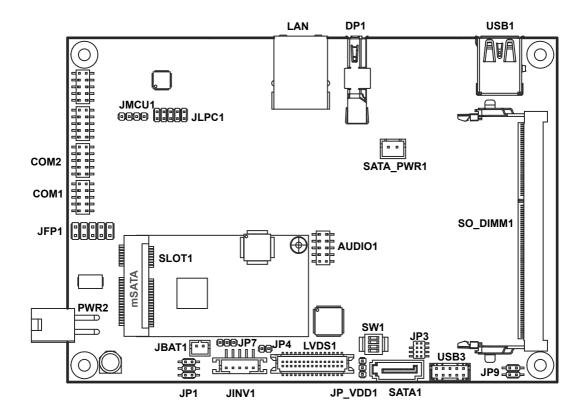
BE-0981 Main Board Component Location (Top View)
